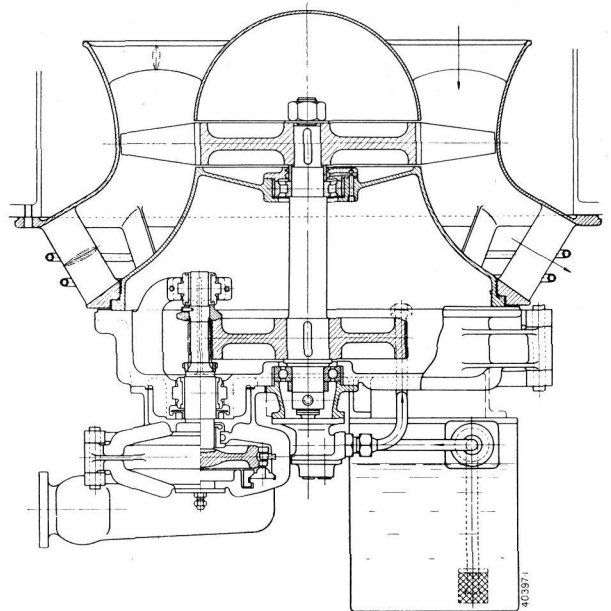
Brown Boveri single-stage, vertical-shaft axial blower, with steam turbine drive for warship boiler plant with closed stokehold.
